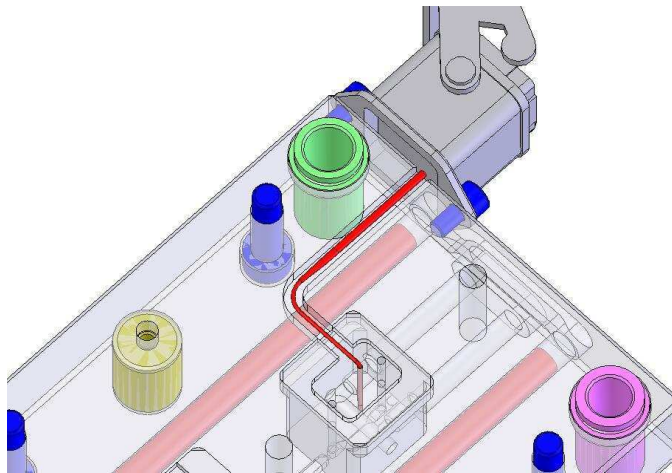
Overview of the thermocouple assembly on the moulding block
